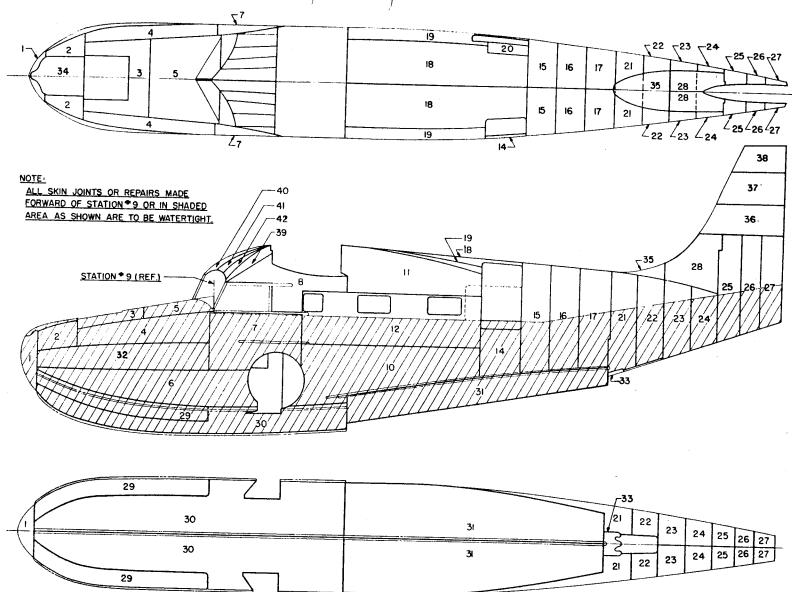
Hull Skin Plating Diagram (Sheet 1)
